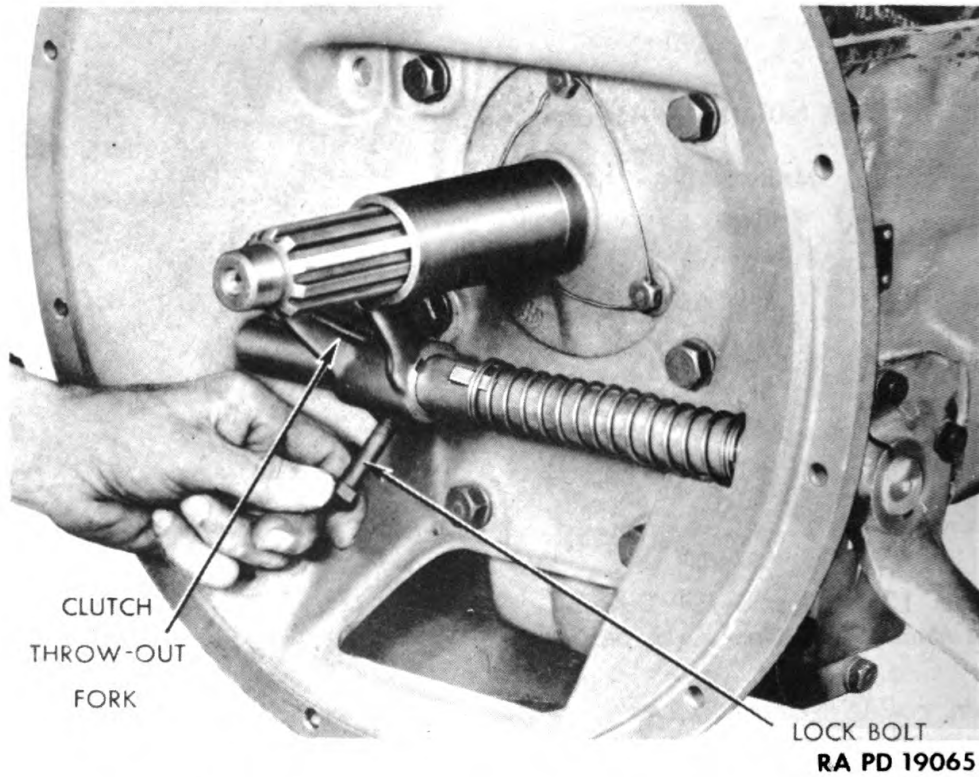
Removing Clutch Throw-out Fork Lock Bolt
